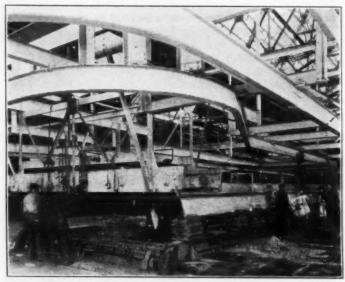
After the Molds Have Been Poured They Travel to the End of the Outside Conveyor Where They Are Shifted Mechanically to the Center Conveyor That Carries Them to the Shake-Out Room
